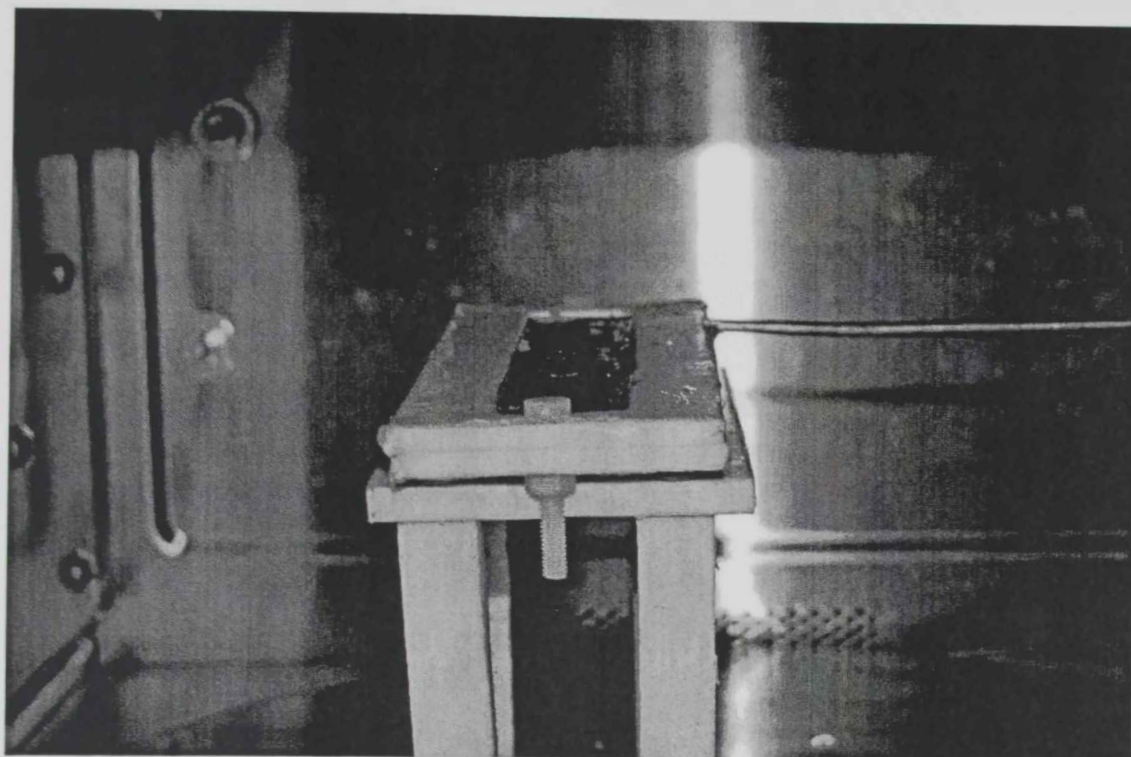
Mold Setup consisting of the mold, Teflon table, and Pt100 Thermocouple
